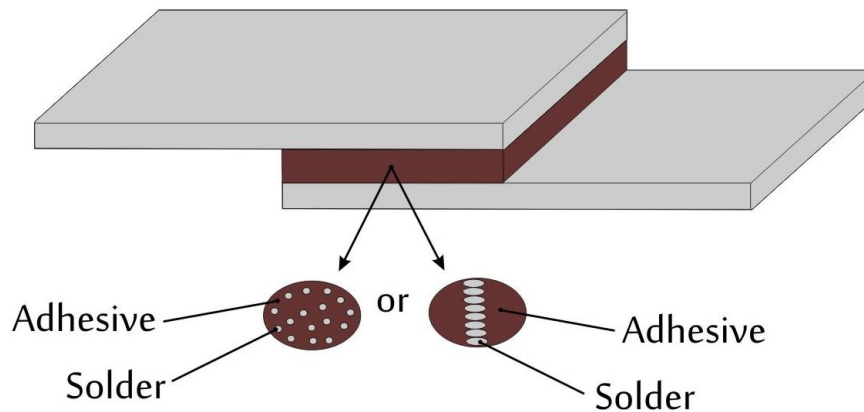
The dispersion of solder in the adhesive-soft soldered joints
